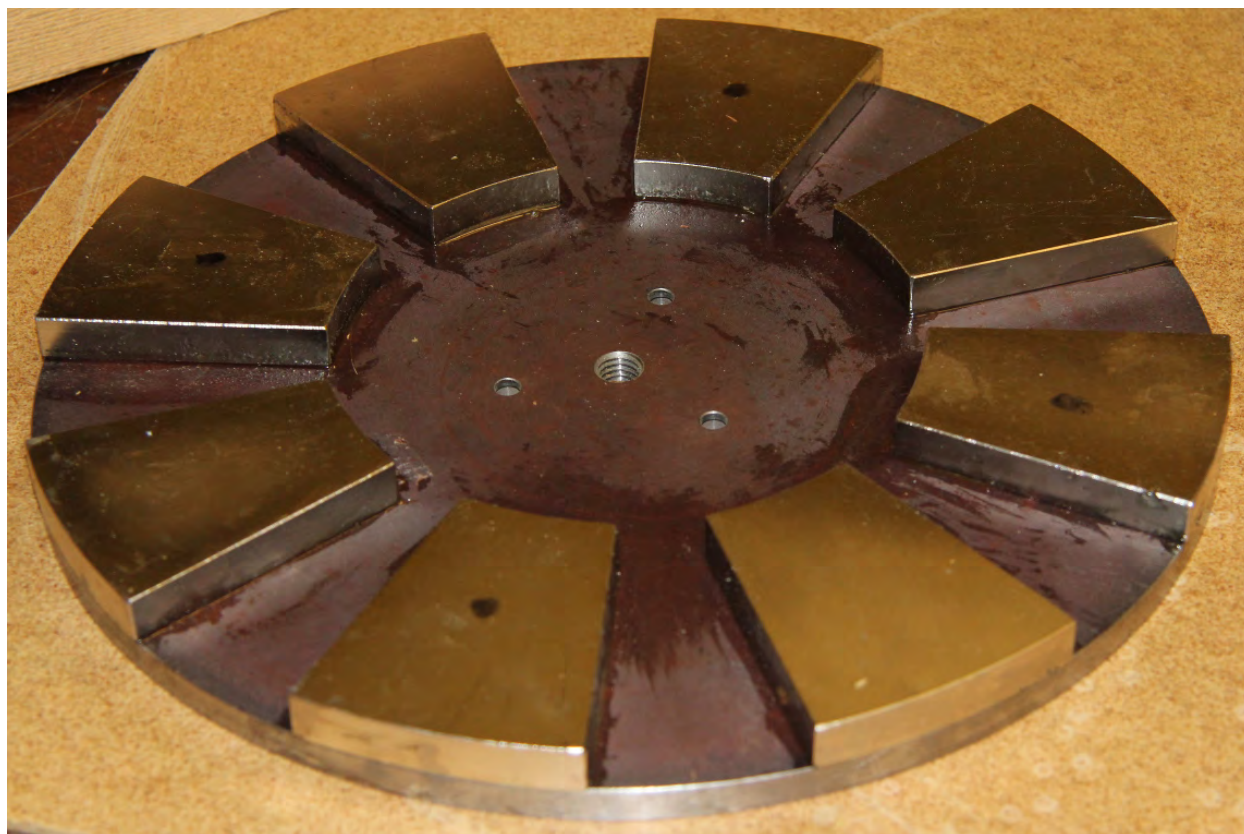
One disc of the magnet rotor. The full rotor is assembled with two facing discs.
